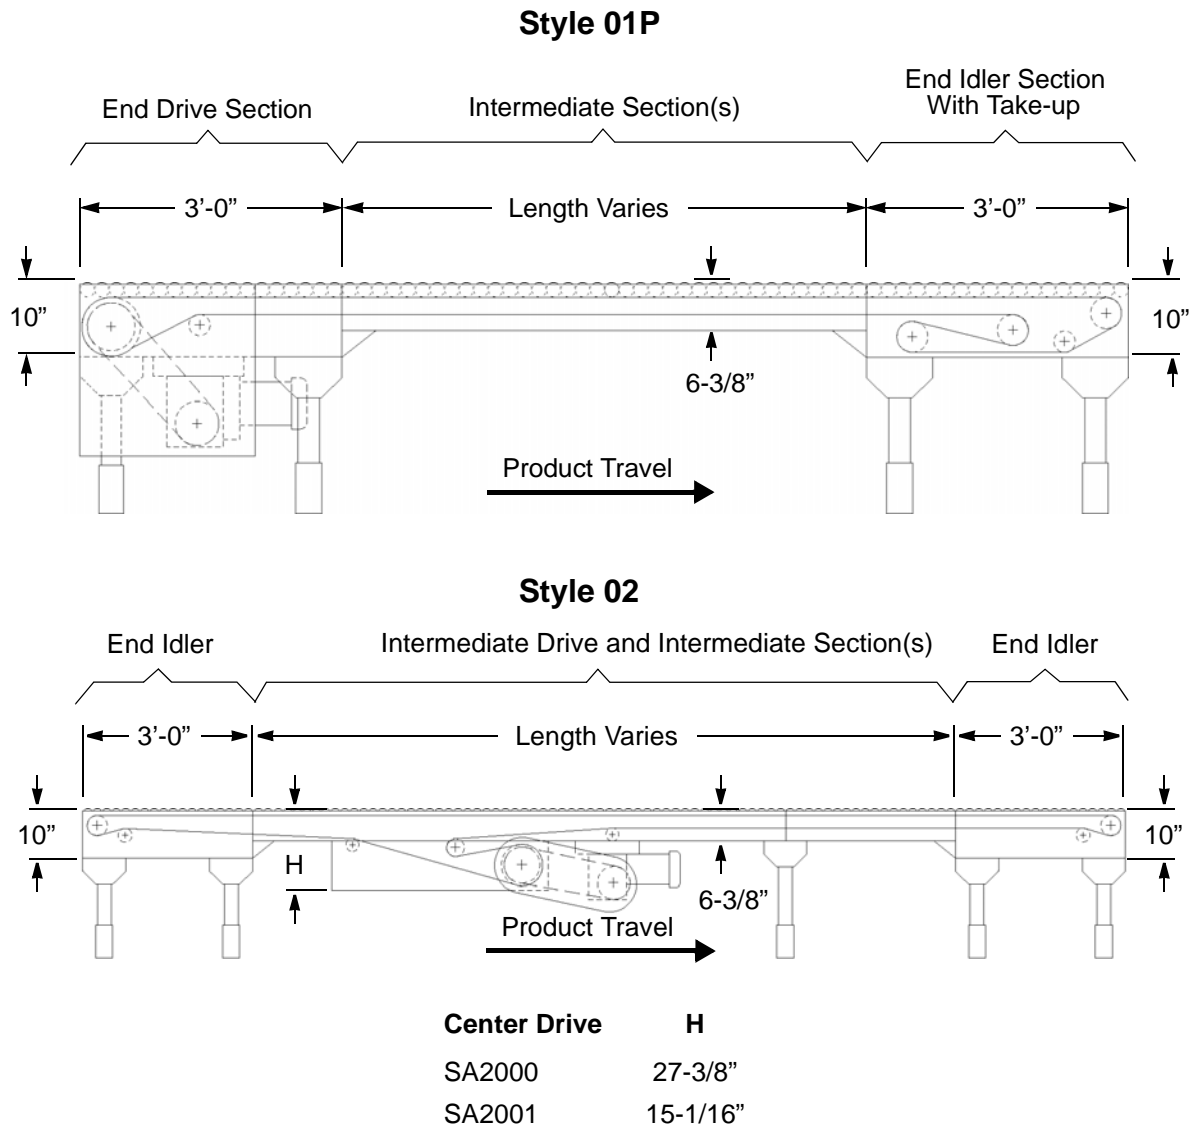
E-Z Set Live Roller Conveyor Dimensions
